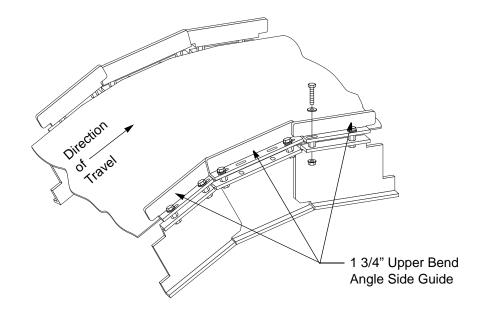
Upper Bend Unit with 1 3/4" Angle Side Guides, Spaced Mounting
